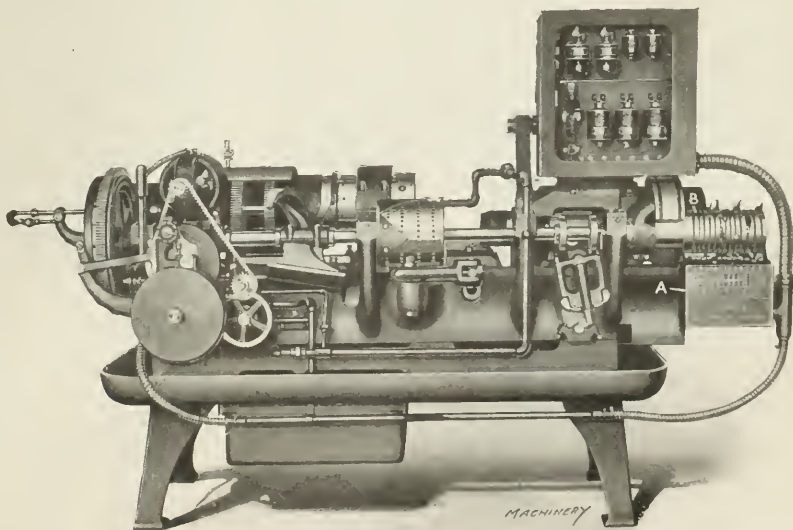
Opposite Side of Machine, showing Arrangement of Automatic Speed Control
